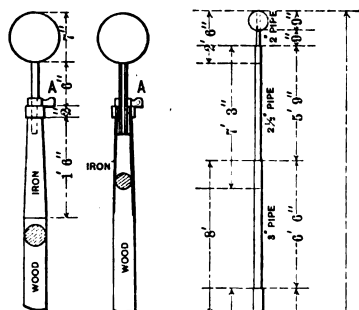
Elevation and Section of a Device for Finishing a Wooden Mast. — Scale, $\frac{1}{4}$ Inch to the Foot.
